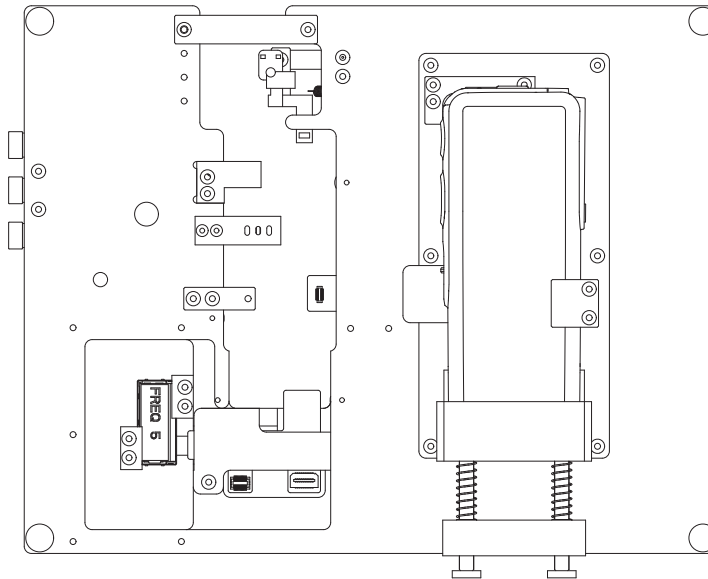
Covert Board Debugging Fixtures with Flexes, Housing and Display (Front)
